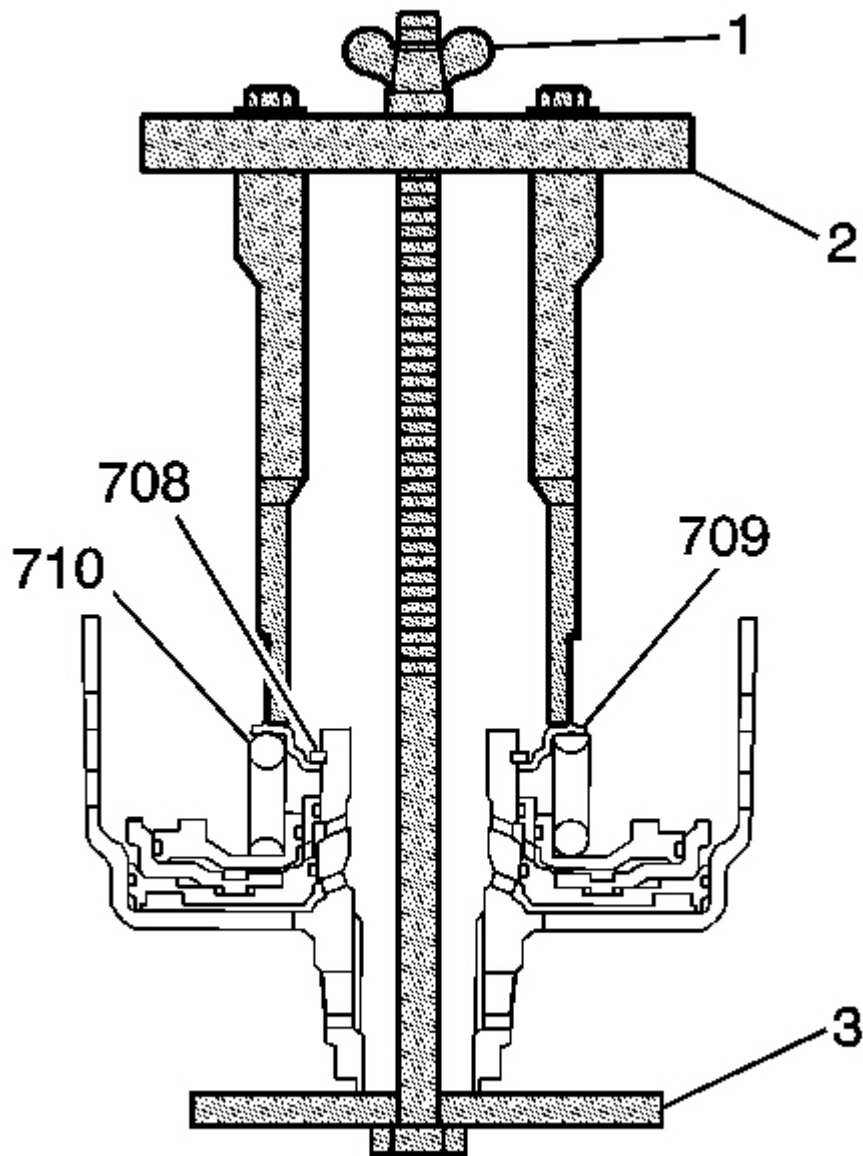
1st/Coast Clutch Assembly, J 45124, J 23327, Clutch Piston Return Spring & Clutch Spring Retainer Cap Retaining Ring
